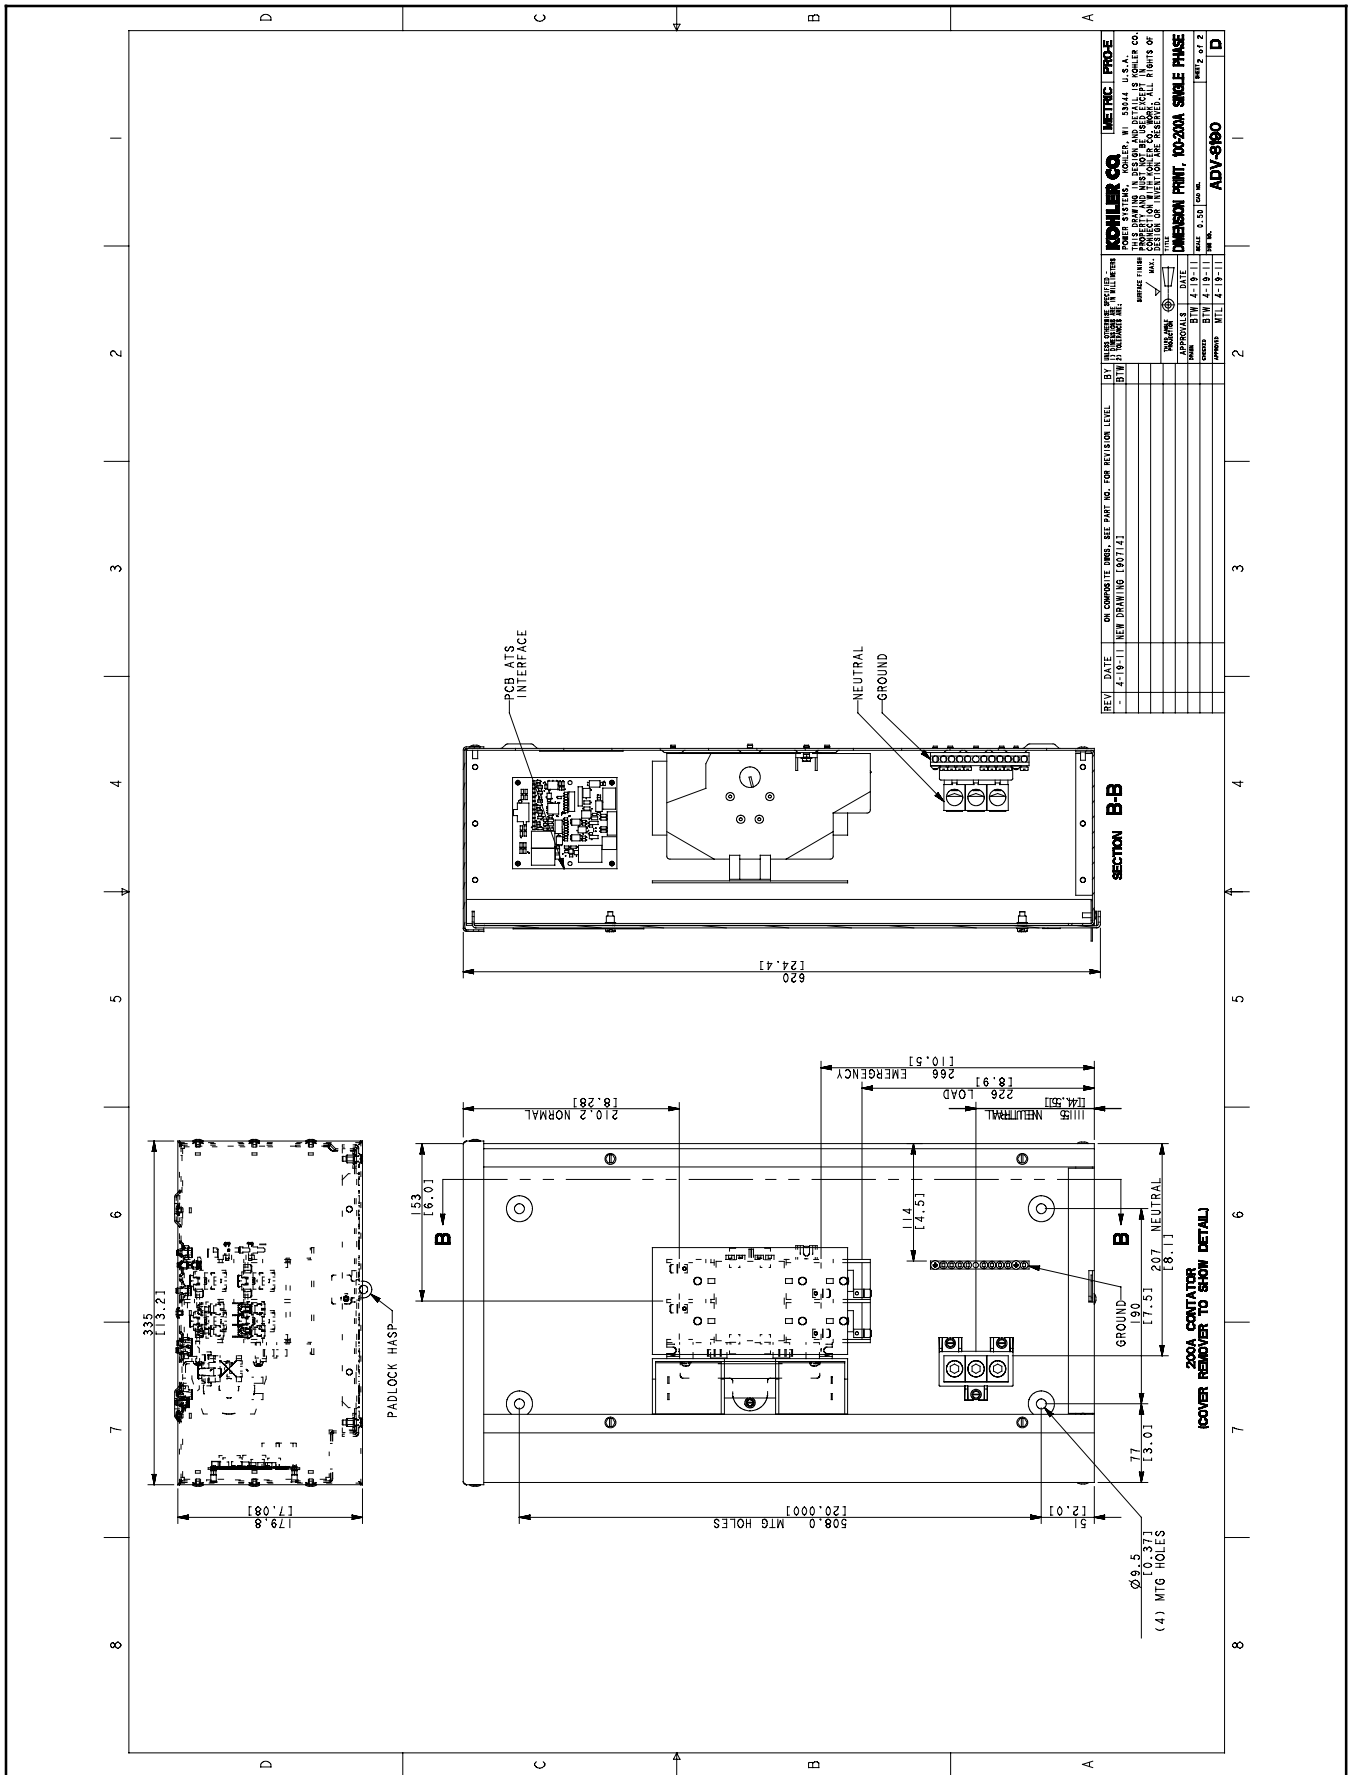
Enclosure Dimensions, 100-200 Amp Single-Phase, ADV-8190, Sheet 2 of 2
